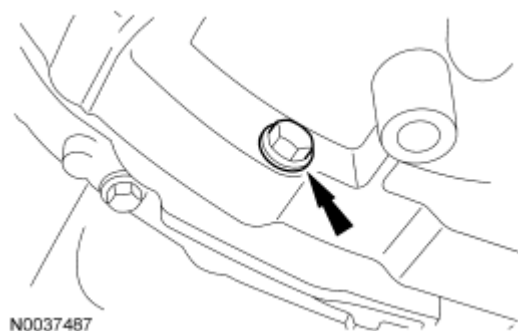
Locating Bellhousing-To-Oil Pan Bolt
